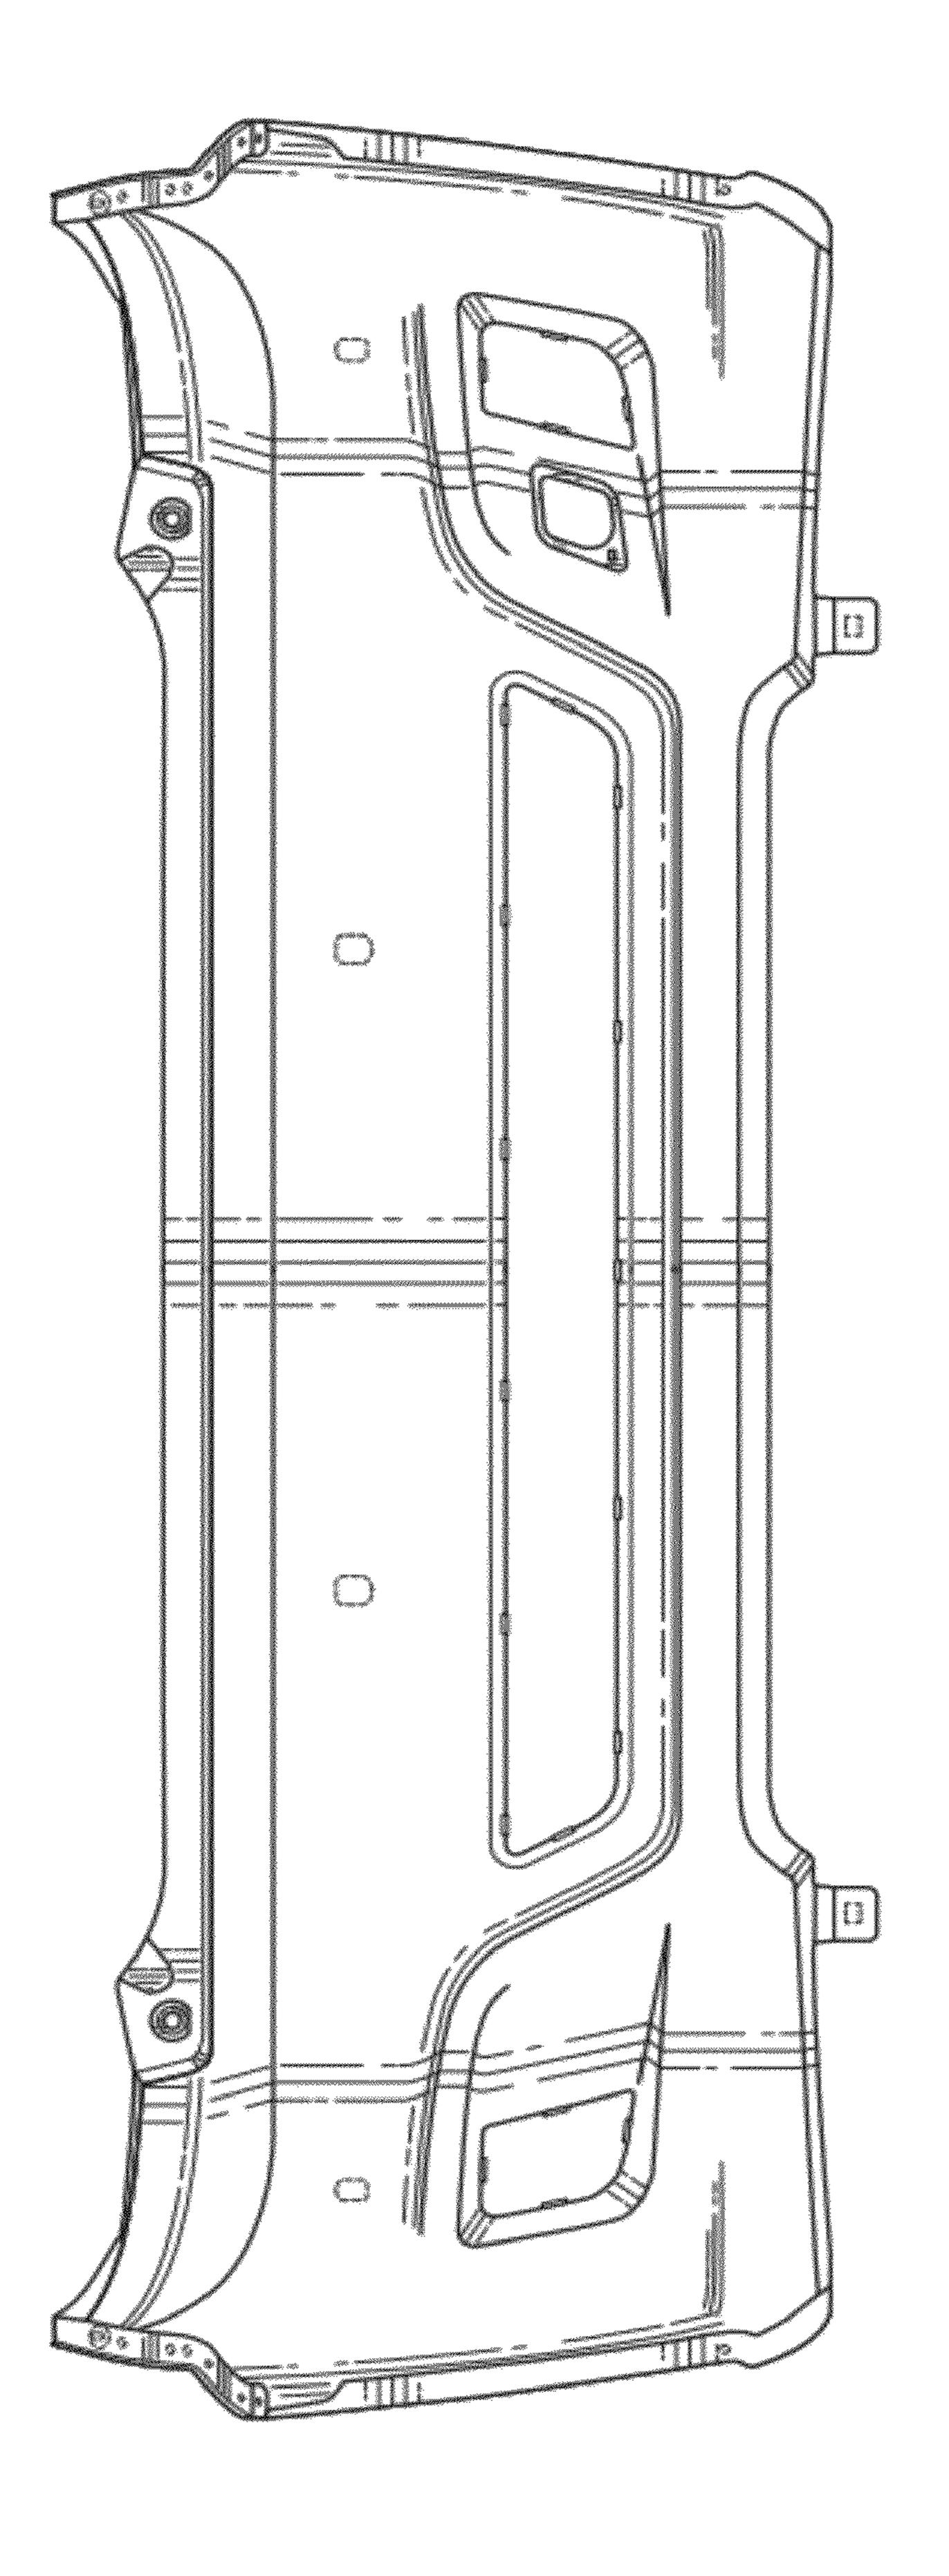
is a bottom view of the vehicle rear bumper; and,
